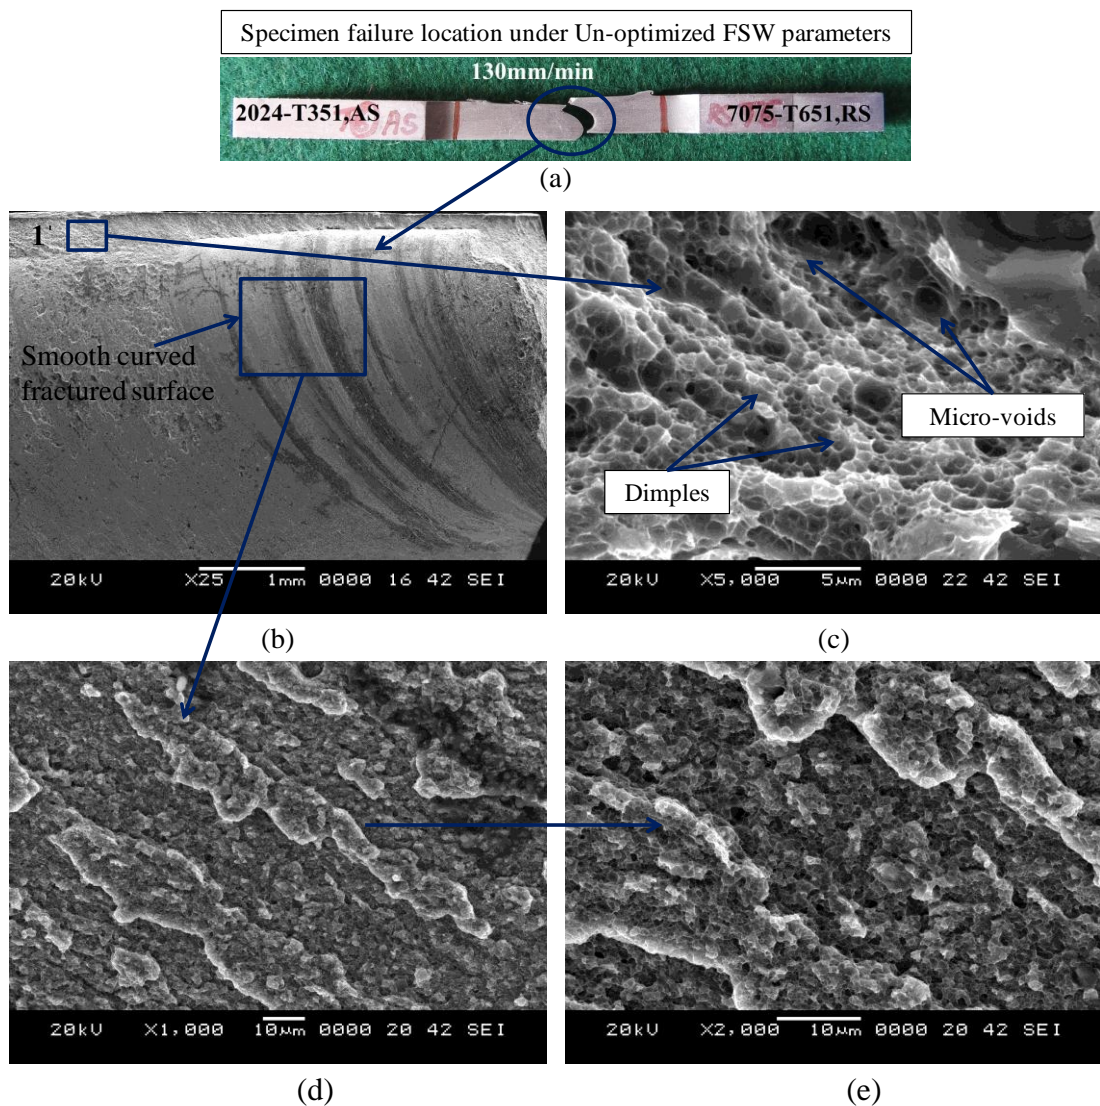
(a) Photograph showing fractured FSW joint failure location for un-optimized FSW parameters. (b)- (e) SEM images of FSW joint of (a).
